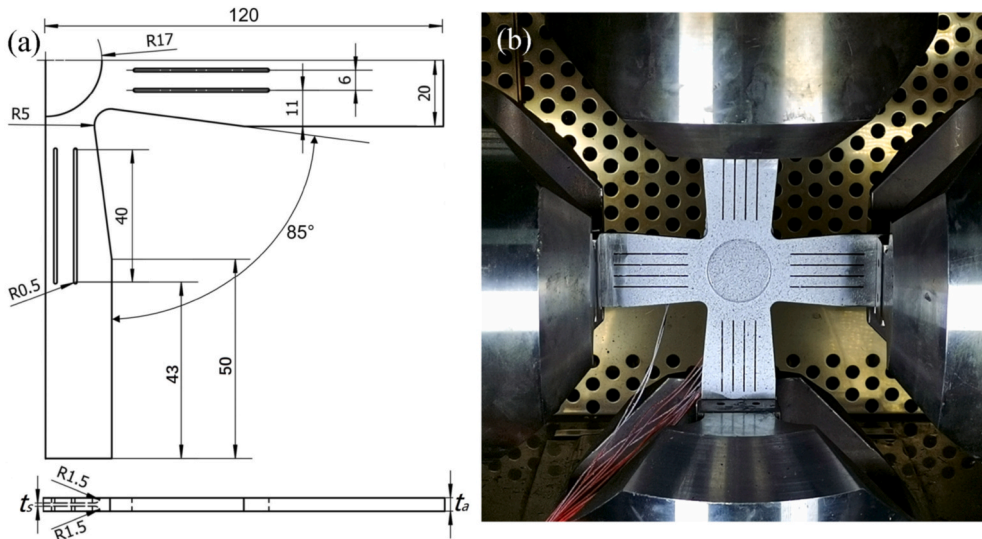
The biaxial tensile test (a) cruciform specimen geometric dimensioning, (b) the installation position of the cruciform specimen.
